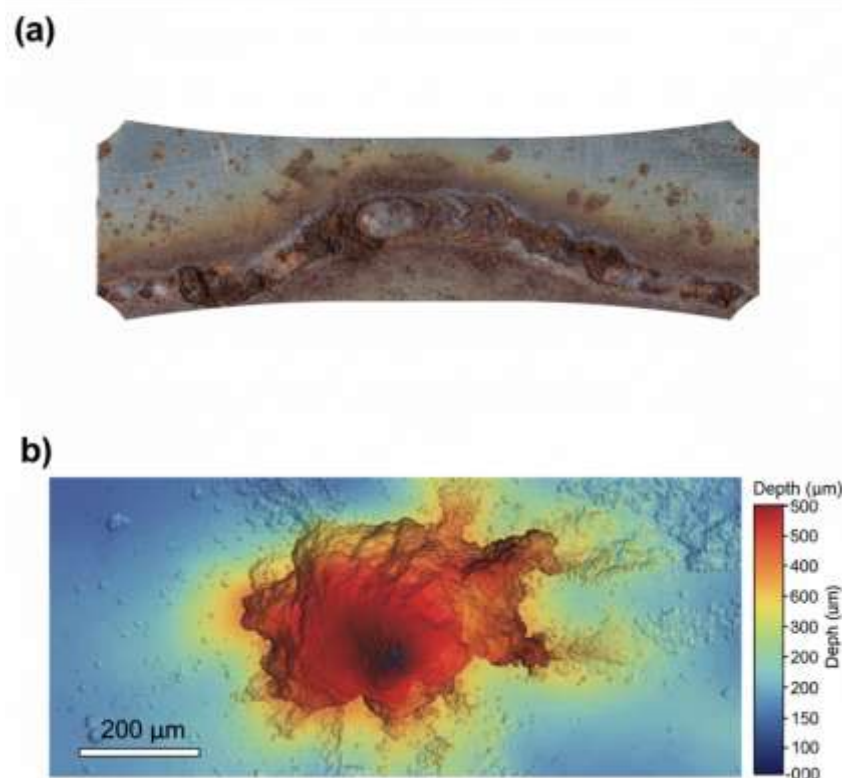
Characterization of artificial corrosion damage on the EH690 butt joint surface after 720 hours of salt spray exposure (ASTM B117). (a) Optical photograph showing the uniform rust layer and localized pitting corrosion concentrated at the weld toe region. (b) 3D profilometry image of a representative corrosion pit at the weld toe, with a color scale indicating pit depth. The pit shown has a depth of approximately 0.5 mm, acting as a severe stress concentration site.
